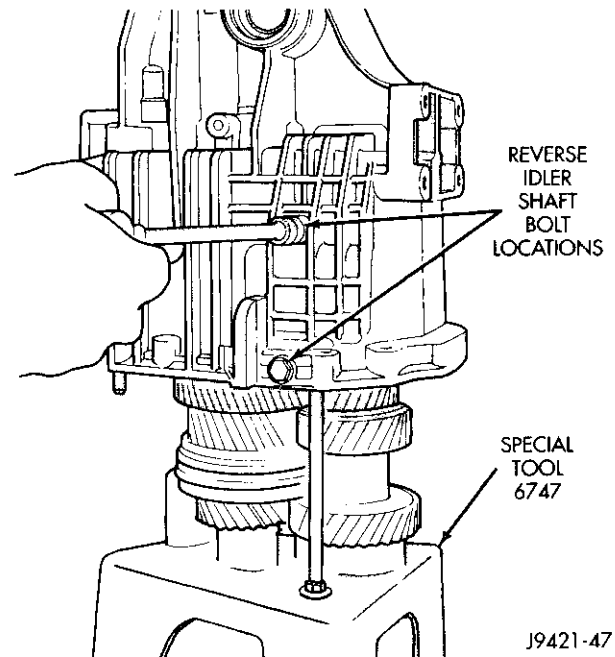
Removing/Installing Reverse Idler Shaft Bolts
